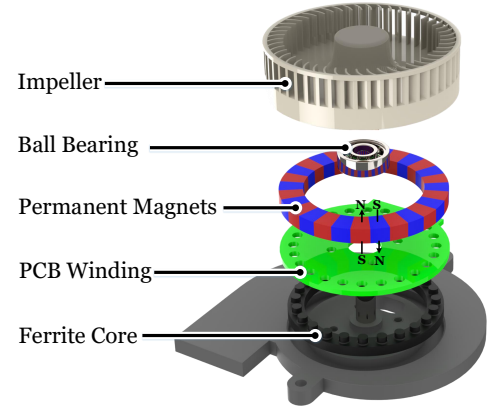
Exploded view of the case study; The PCB winding motor with a ferrite core.
